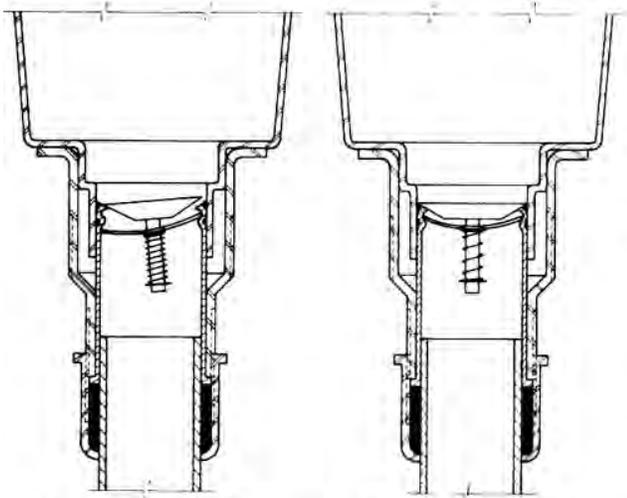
Inlet Valve Assembly: (A) Circlip, (B) Spring, (C) Ratchet Plate.
